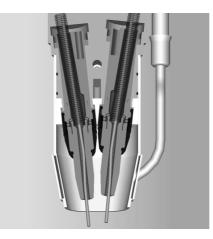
Detailed view of the welding torch for the tandem process TimeTwin. Here, the two contact tubes are electrically insulated from one another.
